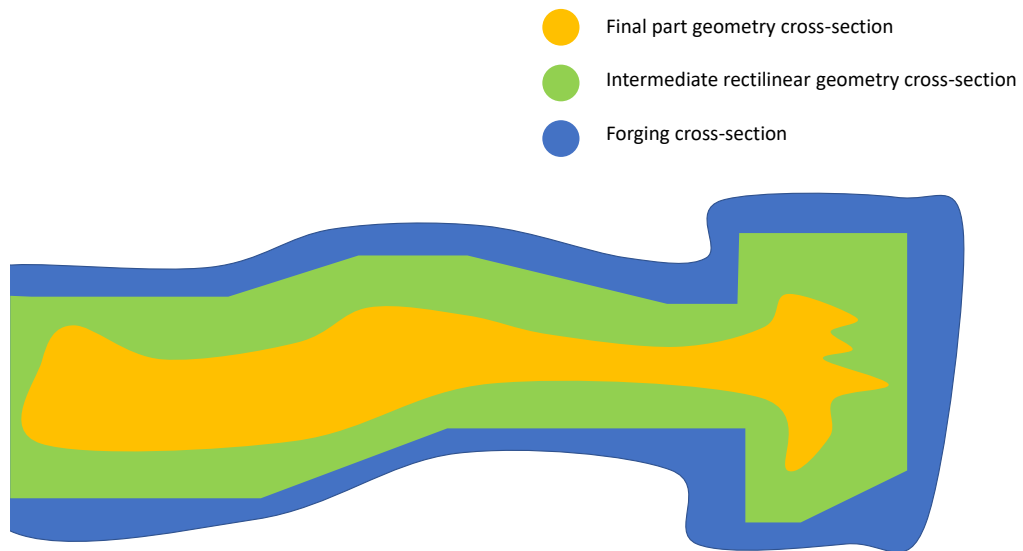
Illustration of different cross sectional geometries relating to stages of forging and inspection process. The original forging is shown in blue, which is machined down to the rectilinear stage shown in green. Finally, the component is milled and polished to its final form, shown in yellow.
